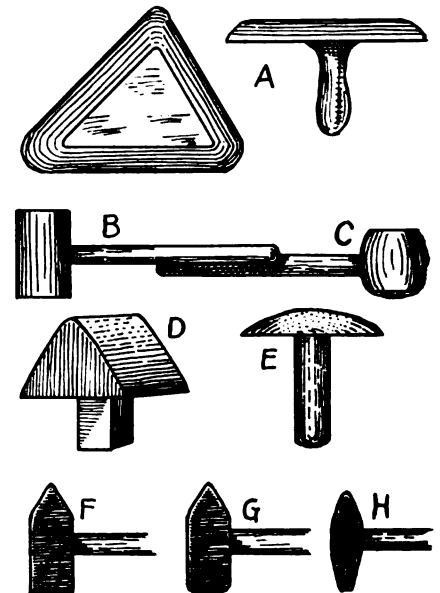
SOME OF THE TOOLS USED IN STRAIGHTENING SHEET METAL PARTS
